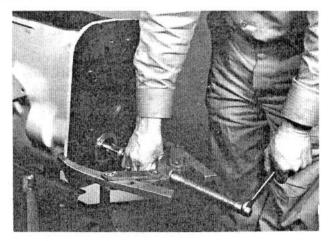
Pushing Countershaft Out of Rear Bearing
